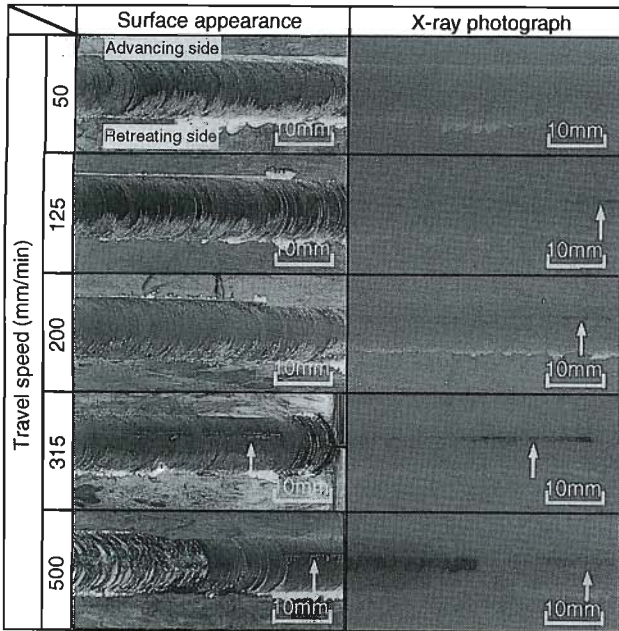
General appearances and X-ray photographs of AZ91D FS Welds at constant tool rotating speed, 1240 rpm.
